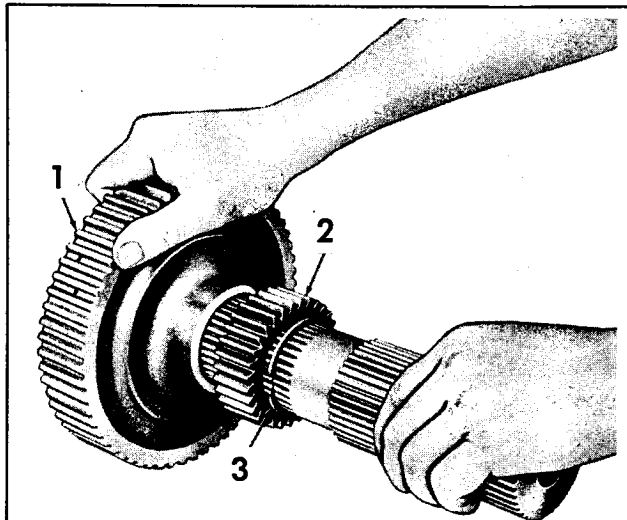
Disassemble Intermediate Range Clutch Hub and High Range Sun Gear
